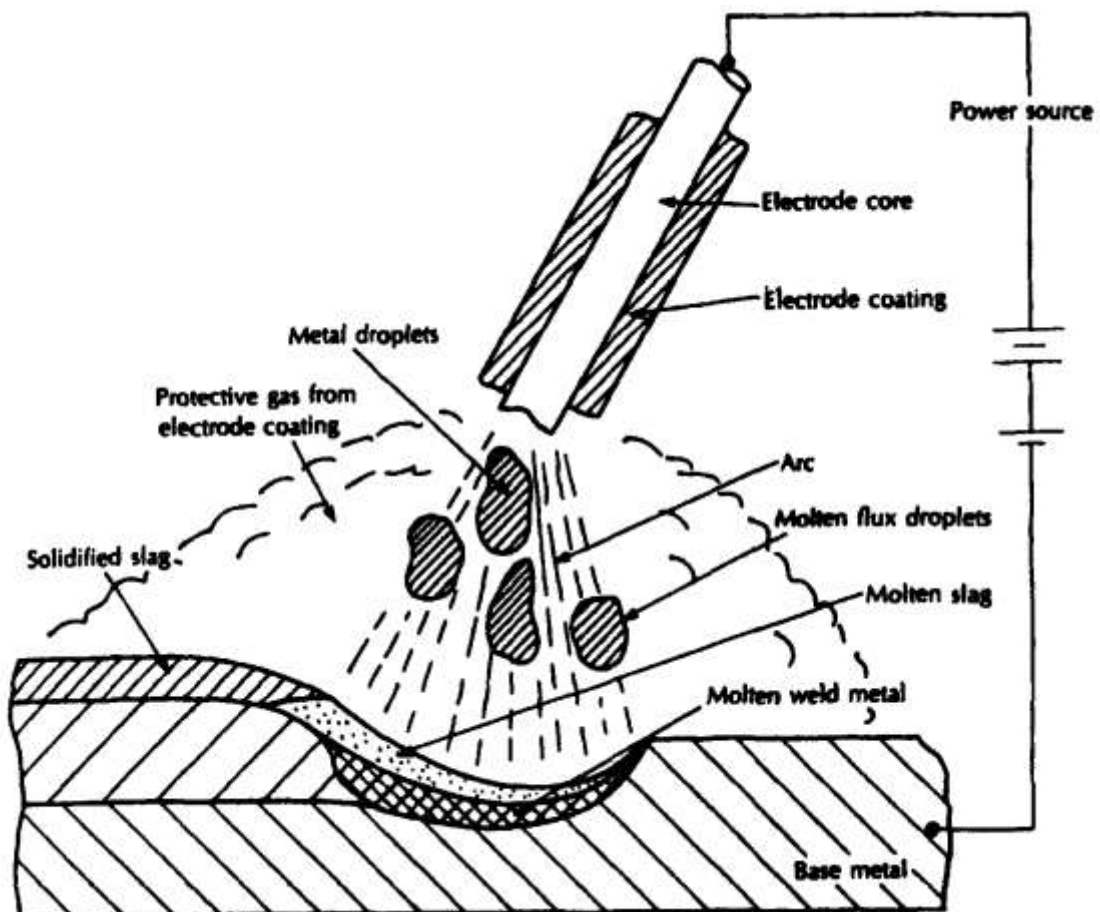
Principles of the manual metal arc welding process [6].
